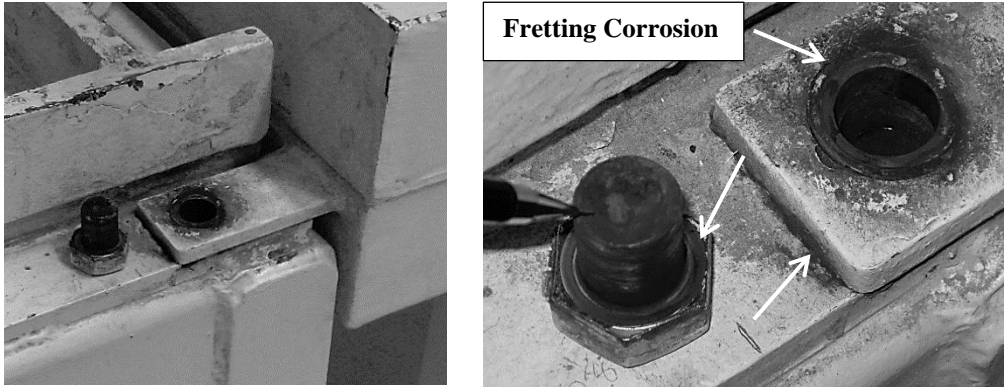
Machine Frames Bolted Together. Bolt and Frame Fretting Corrosion Indicated Looseness (Arrows). No Flat Washer. Bolt Failed in Fatigue Which Was Indicated by Beach Marks and Final Rupture Zone.
